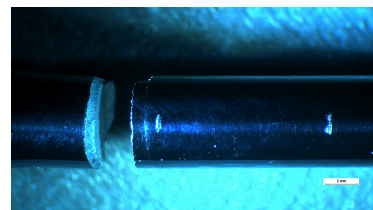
Fracture on sample 0902 happened out of the extensometer marks.
